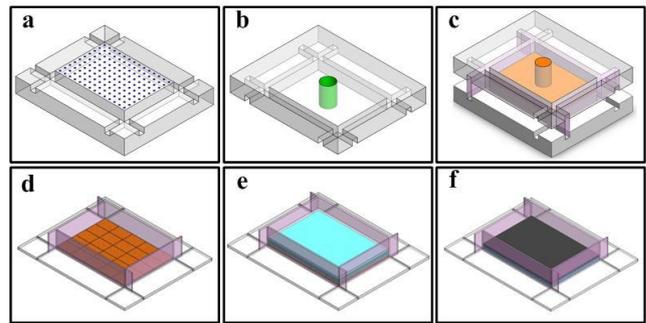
Schematic illustration of manufacturing process flows to fabricate a large-area epoxy resin mold with micro-sized structures: a–cell mold machining; b–fabrication of a cell silicone rubber mold; c–repeated fabrication of 24 cell silicone rubber molds; d–joining 25 cell silicone rubber molds to a large-area silicone rubber mold; e–fabrication of a large-area silicone rubber mold with negative shape; f–fabrication of a large-area epoxy resin mold
